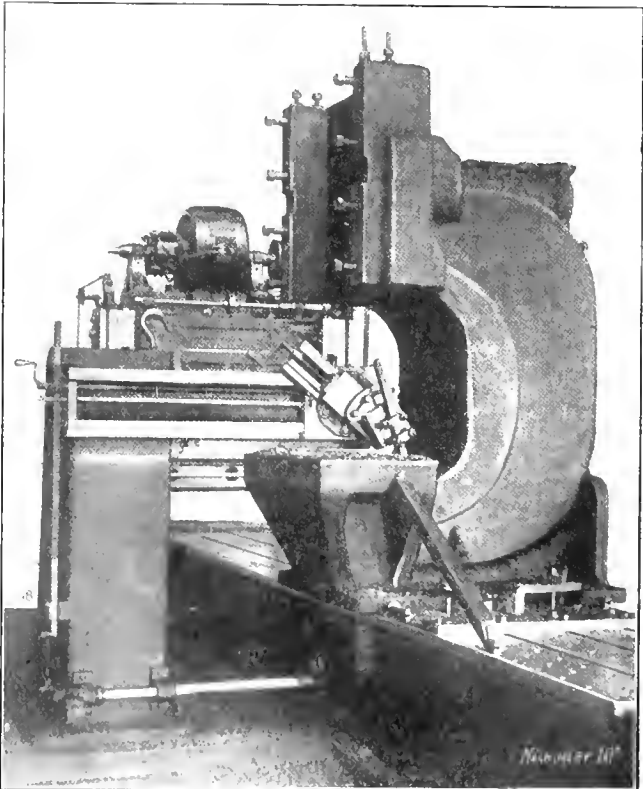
Planing the Lower Jaw of a 16,000 pound Shear Casting
